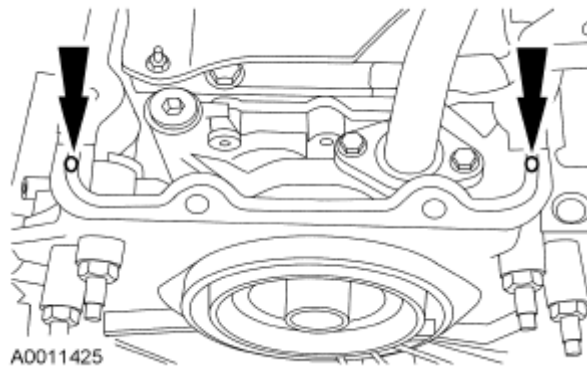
Locating Dot Of Silicone Gasket & Sealant
